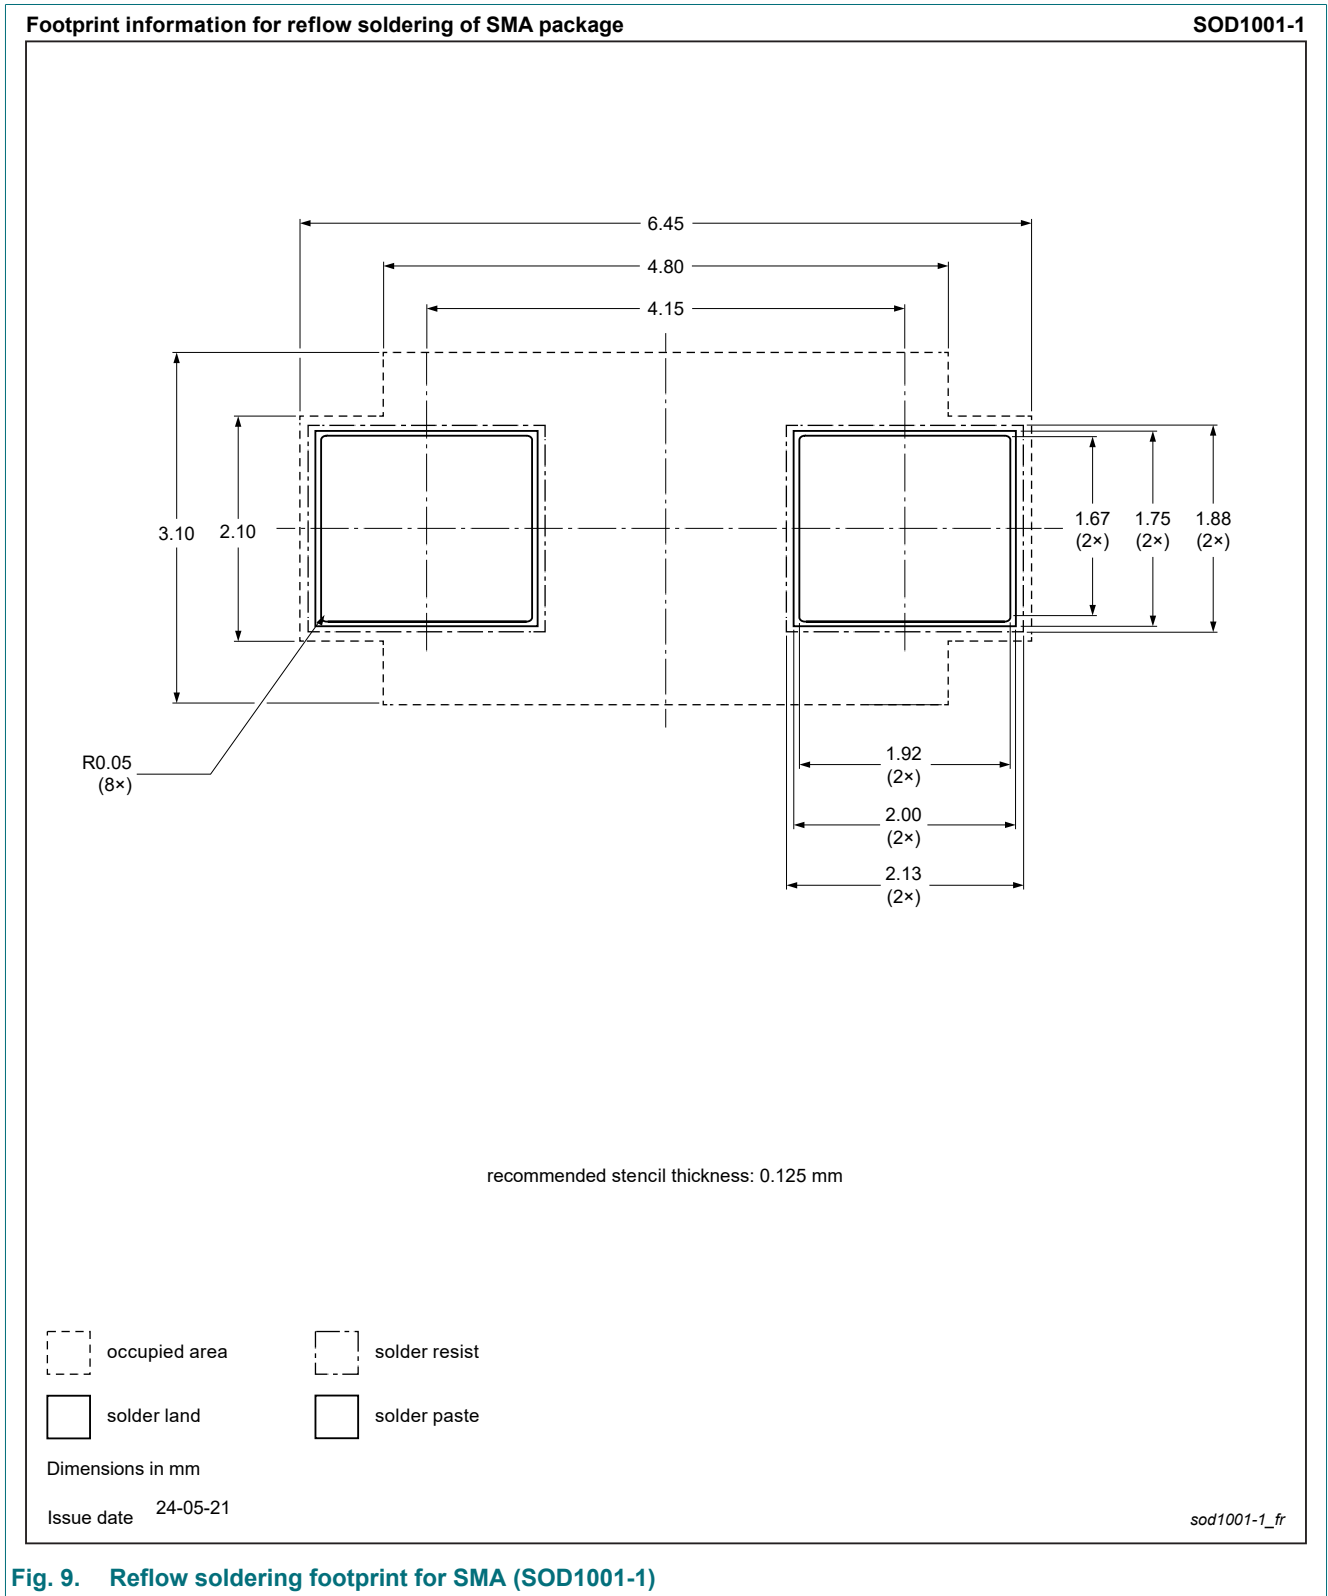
Reflow soldering footprint for SMA (SOD1001-1)
